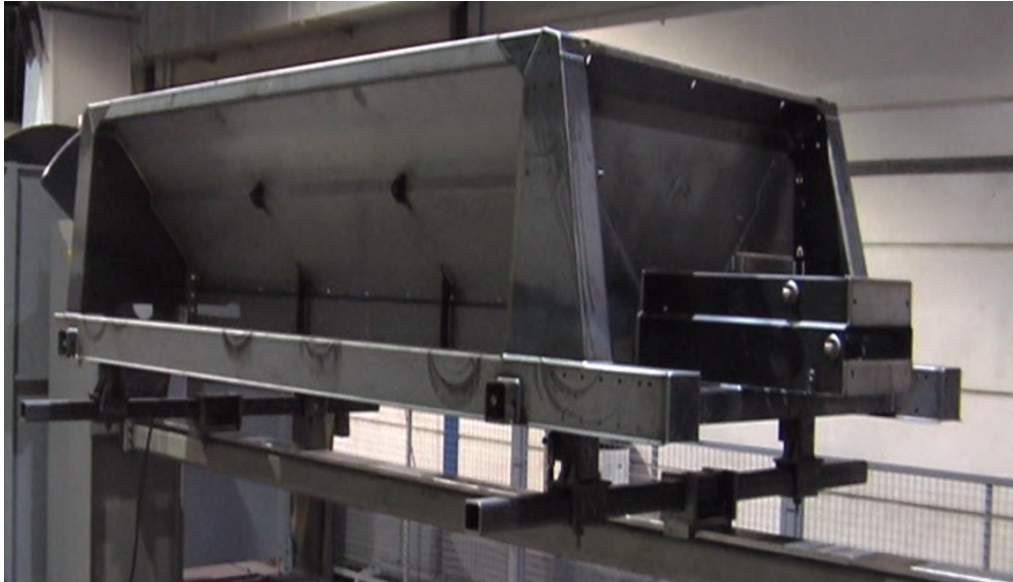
A fully welded Kasko S3 on a fixture in one of the welding robot work stations. (Source: Aebi Schmidt)
